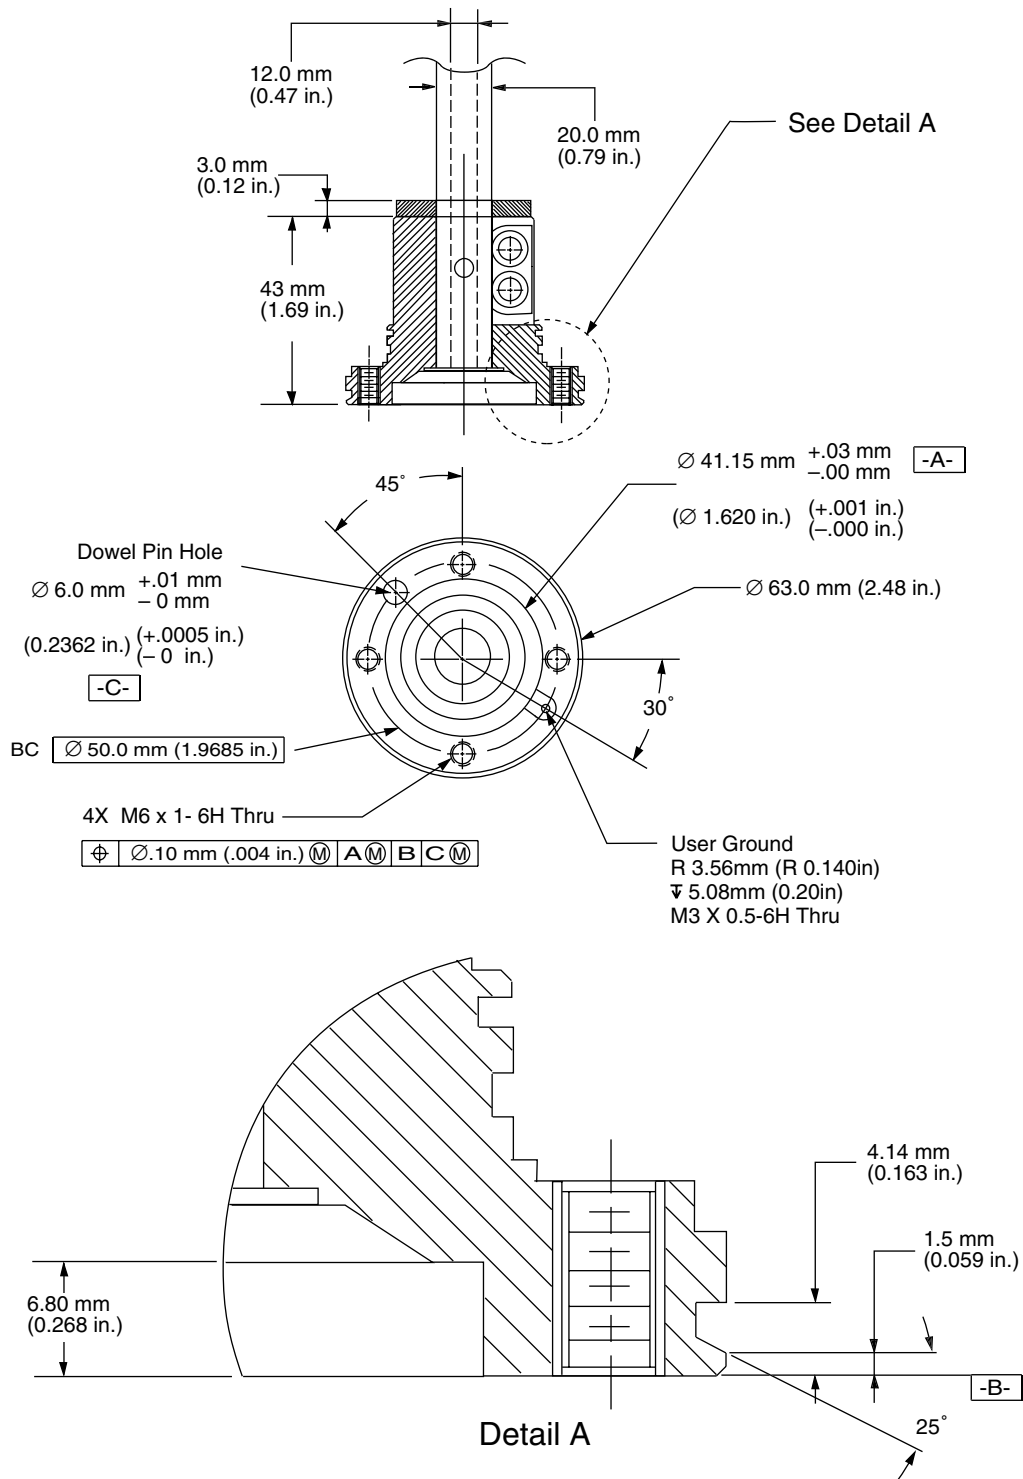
Tool Flange Dimensions for Adept Cobra Robots
